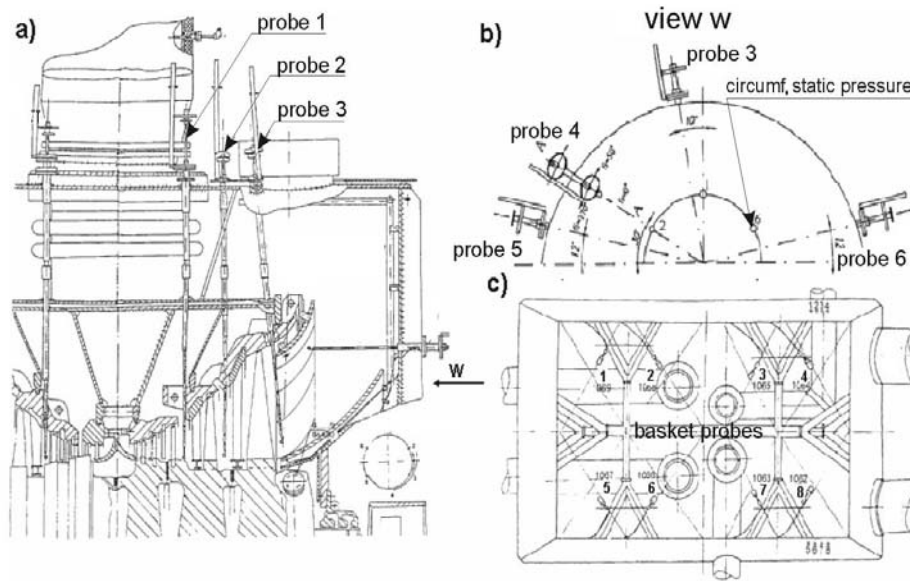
Measuring instrumentation in LP part of 18K-360 turbine: a) turbine axial cross-section, b) exhaust hood inlet circumferential cross-section, c) exhaust hood exit cross-section – before condenser.
